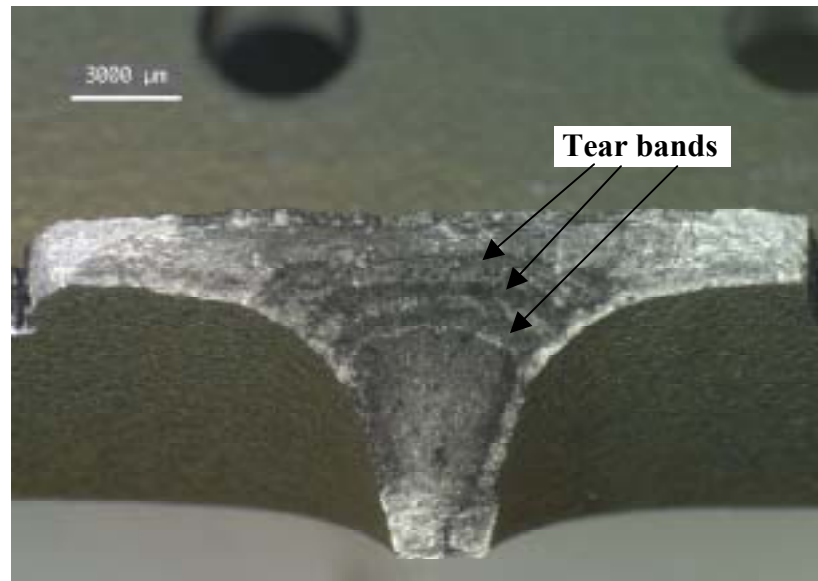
Fracture surface of longeron (left-hand side-LHS) in F-111 showing several tear bands.
